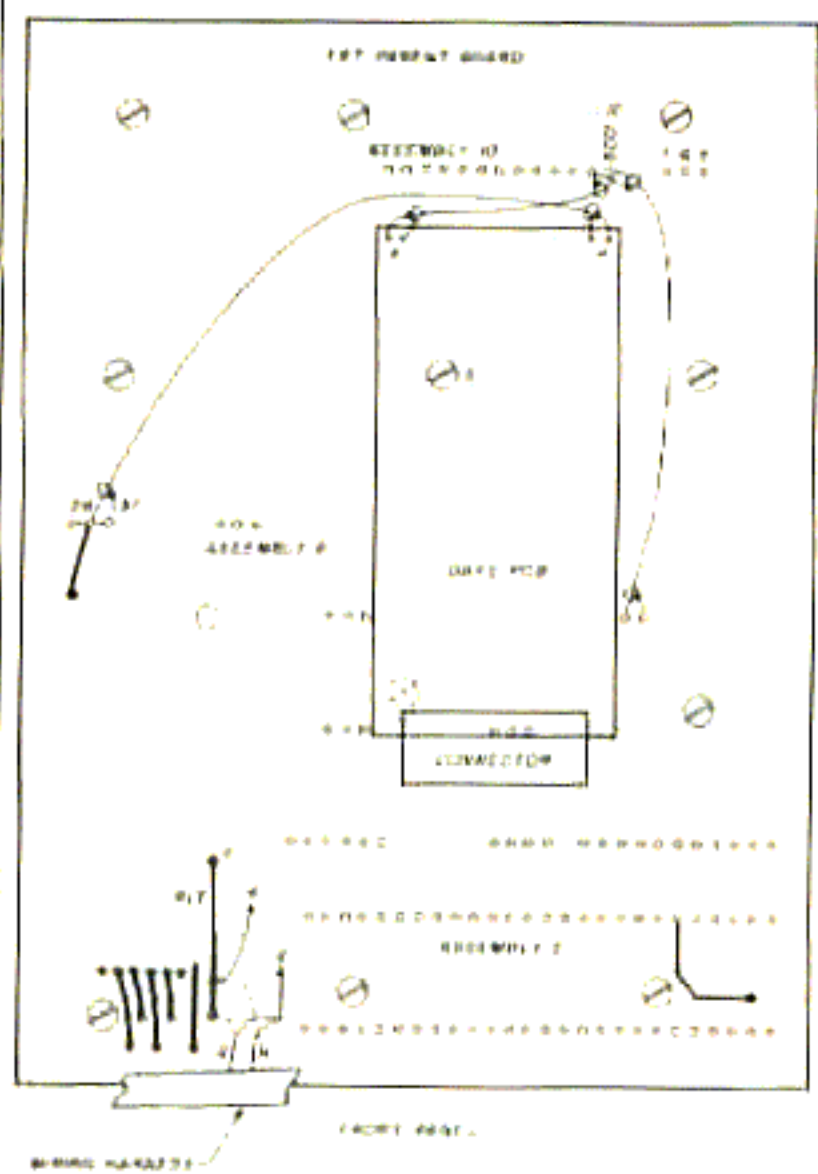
Positioning of the DAFC PCB on the TR7 main board and arrangement of the different connecting points.
